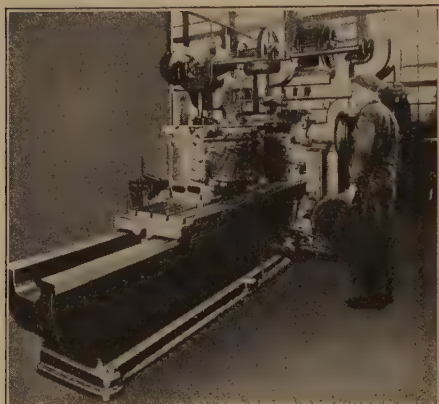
A large planer smoothing off the bottom of a six-cylinder casting.
